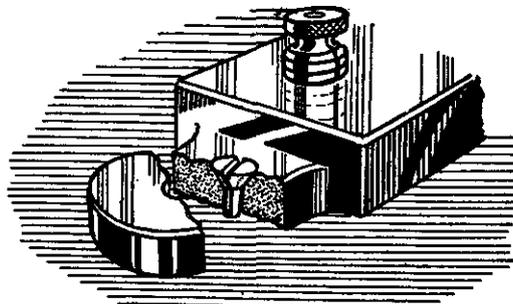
Use of the wrong screw will cause this! Don't use countersunk screws unless the lug hole is countersunk.
